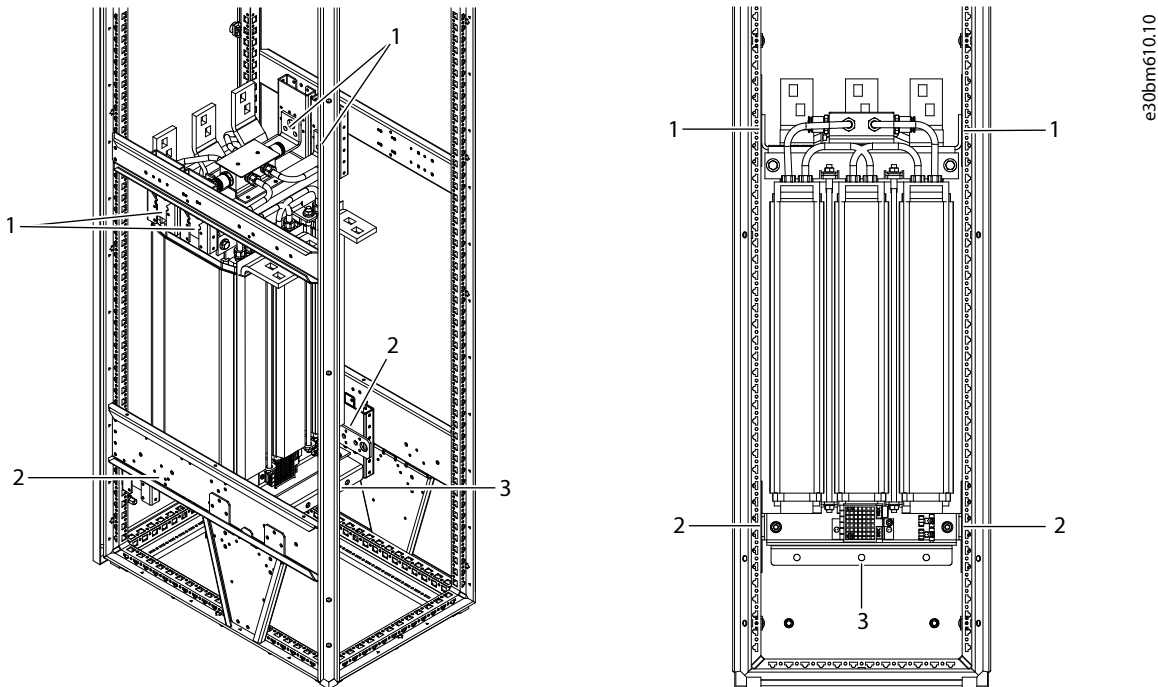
Installing the L Filter into a Cabinet (1640 A, 2300 A)
